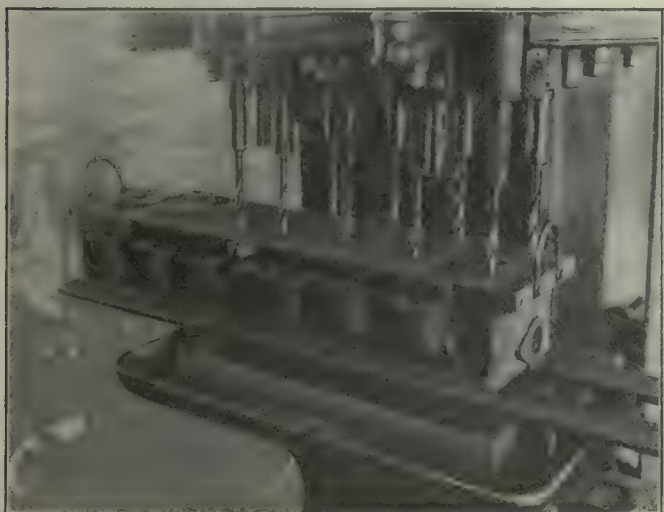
DRILLING HOLES ON CYLINDER SIDE OF HEAD
